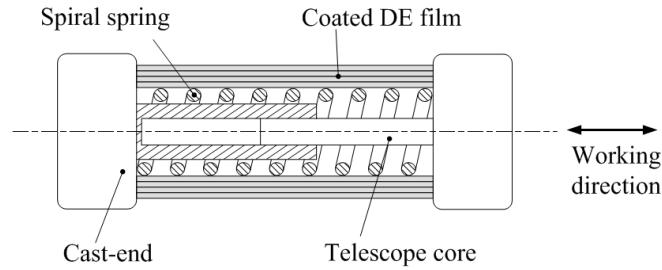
Structure of the spring roll DE actuator with telescope core inside the spiral spring
